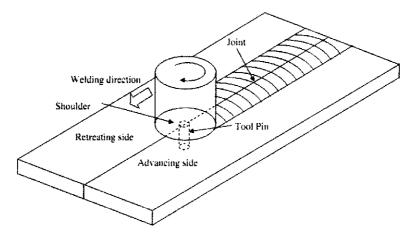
Schematic illustration of the friction stir welding process^[10]
